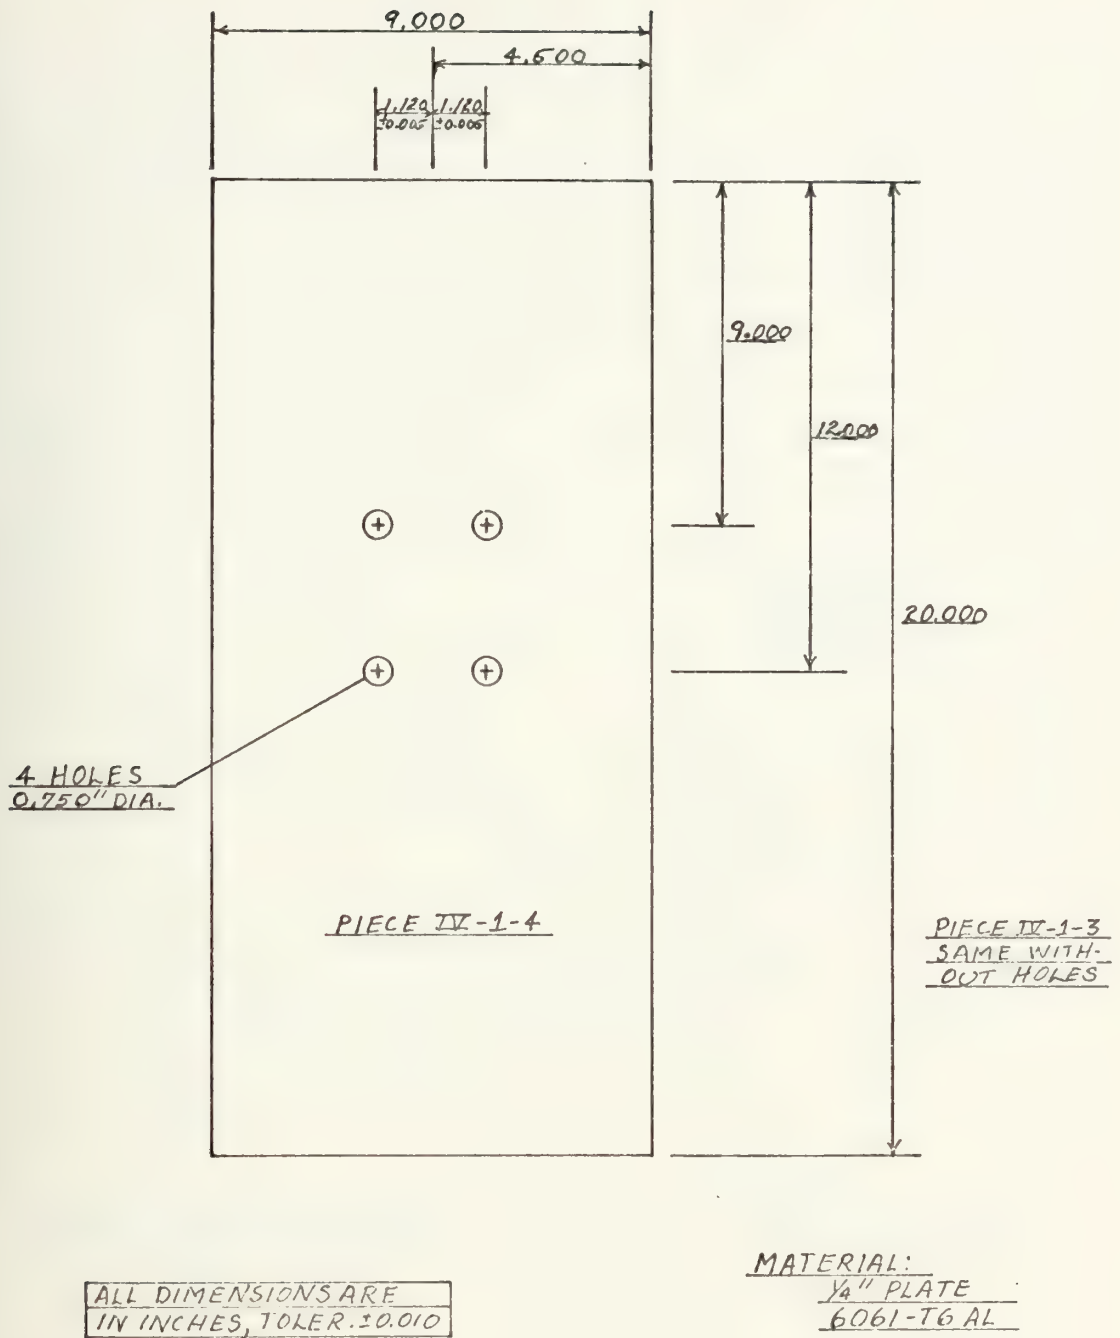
PIECES IV-1-3, 4, SIDES
